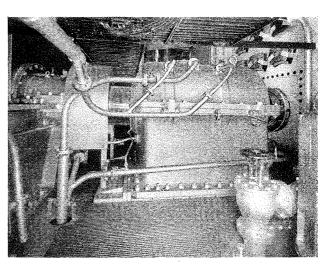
• ne of two six-shoc propeller thrust bearings installed on S.S. "America."
